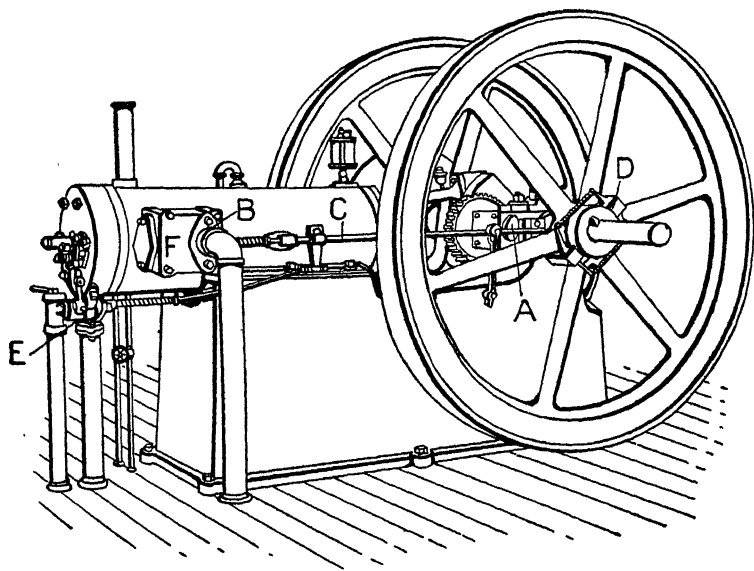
FAIRBANKS-MORSE HORIZONTAL ENGINE.
